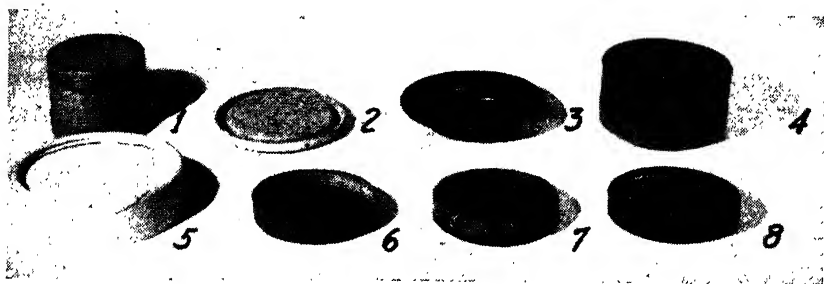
Cutting, drawing, curling, folding, ironing, trimming and upsetting operations employed to produce these soluplastic paper base parts. No. 2 also contains thermoplastic paraffin, whereas 3 and 8 contain thermosetting resins, and cure hard and durable.
